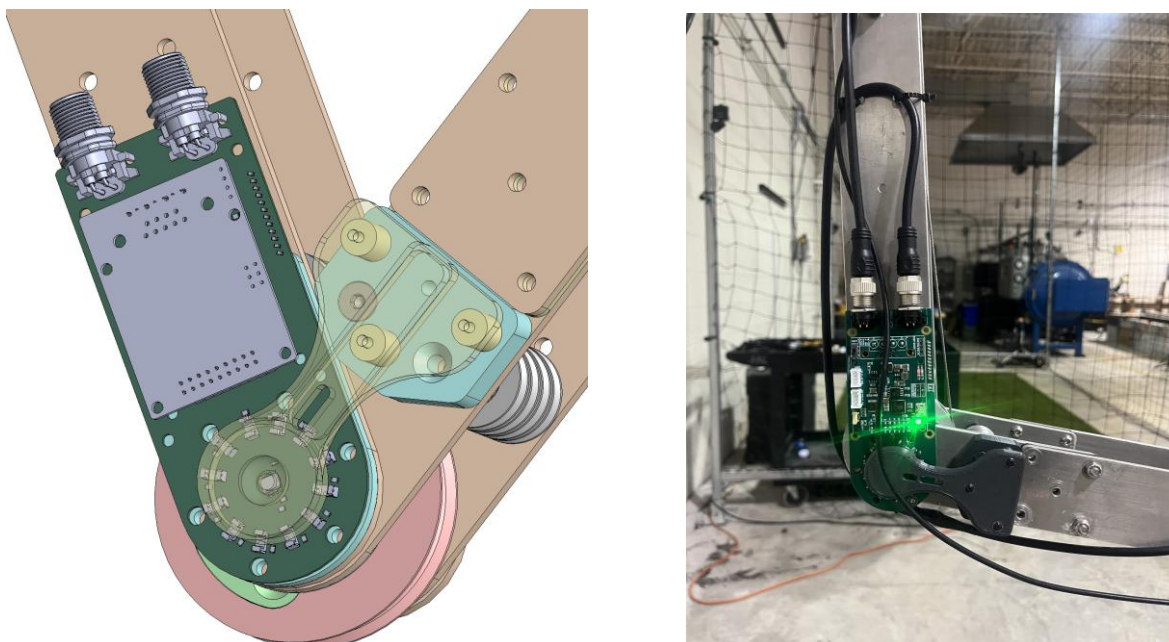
Joint encoder design and physical implementation. (a) CAD model of the joint encoder assembly integrated at the joint pivot. The magnetic disc (pink) rotates against the encoder PCB (green), which also carries the routing board for the drive-wire conduit termination. (b) Physical joint encoder installed on the robot arm. The green PCB with its indicator LED is visible, along with the conduit connectors that protect signal wiring routed along the arm.
